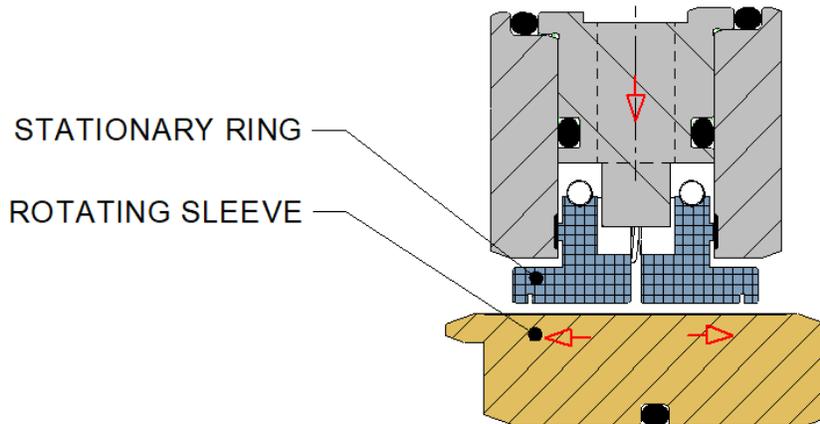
E.7—Show Expansions of the Separation Seal Contacting Bushing and Rotating Surface
